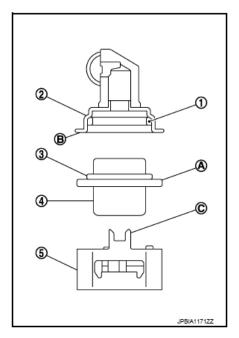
Identifying Fuel Tube, Spacer, Fuel Damper And O-Ring Courtesy of NISSAN MOTOR CO., U.S.A.
